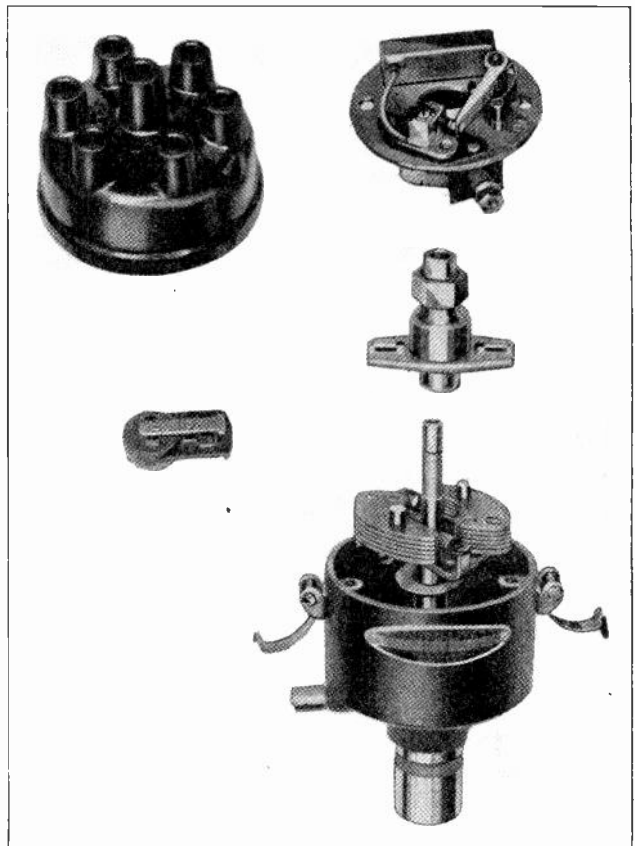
Disassembled view of a distributor with automatic spark advance, showing the governor weights in the view at the lower right.
